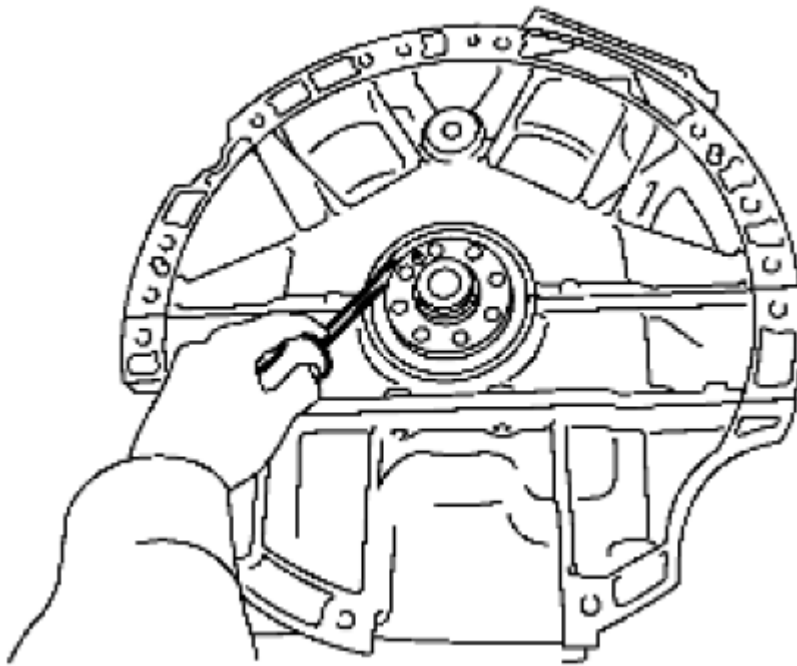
Removing Rear Oil Seal With Suitable Tool
